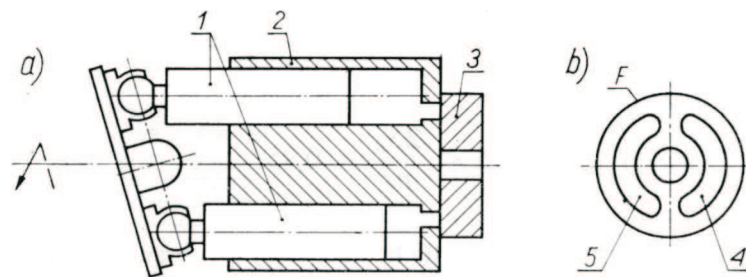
General scheme of axial multi-piston pump: a) cross-section, b) valve plate, 1. pistons, 2. impeller, 3. valve plate, 4. suction hole, 5. compression hole [5]
